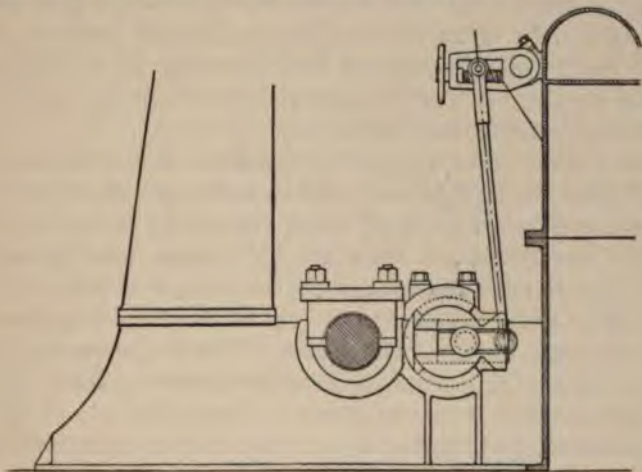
S.S. Coot's Engines: Valve-gear; Eccentric-strap removed, showing Banjo and Slider. Scale 1/40th.
